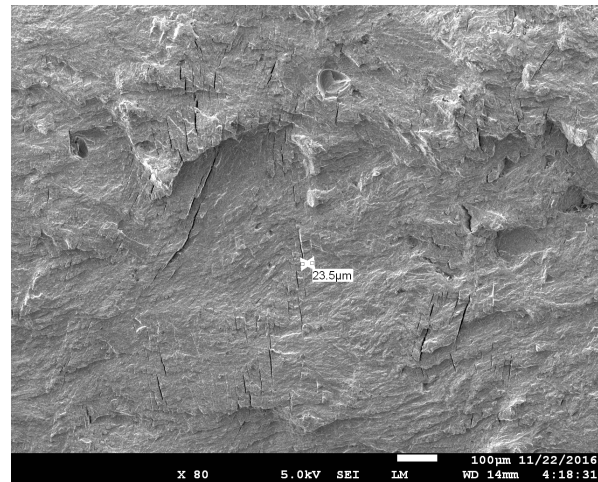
Cracks running over the fracture surface in the thickness direction
